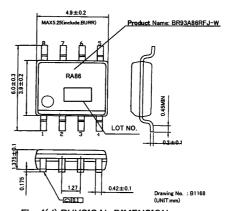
(d) PHYSICAL DIMENSION SOP-J8(BR93A86RFJ-W)
